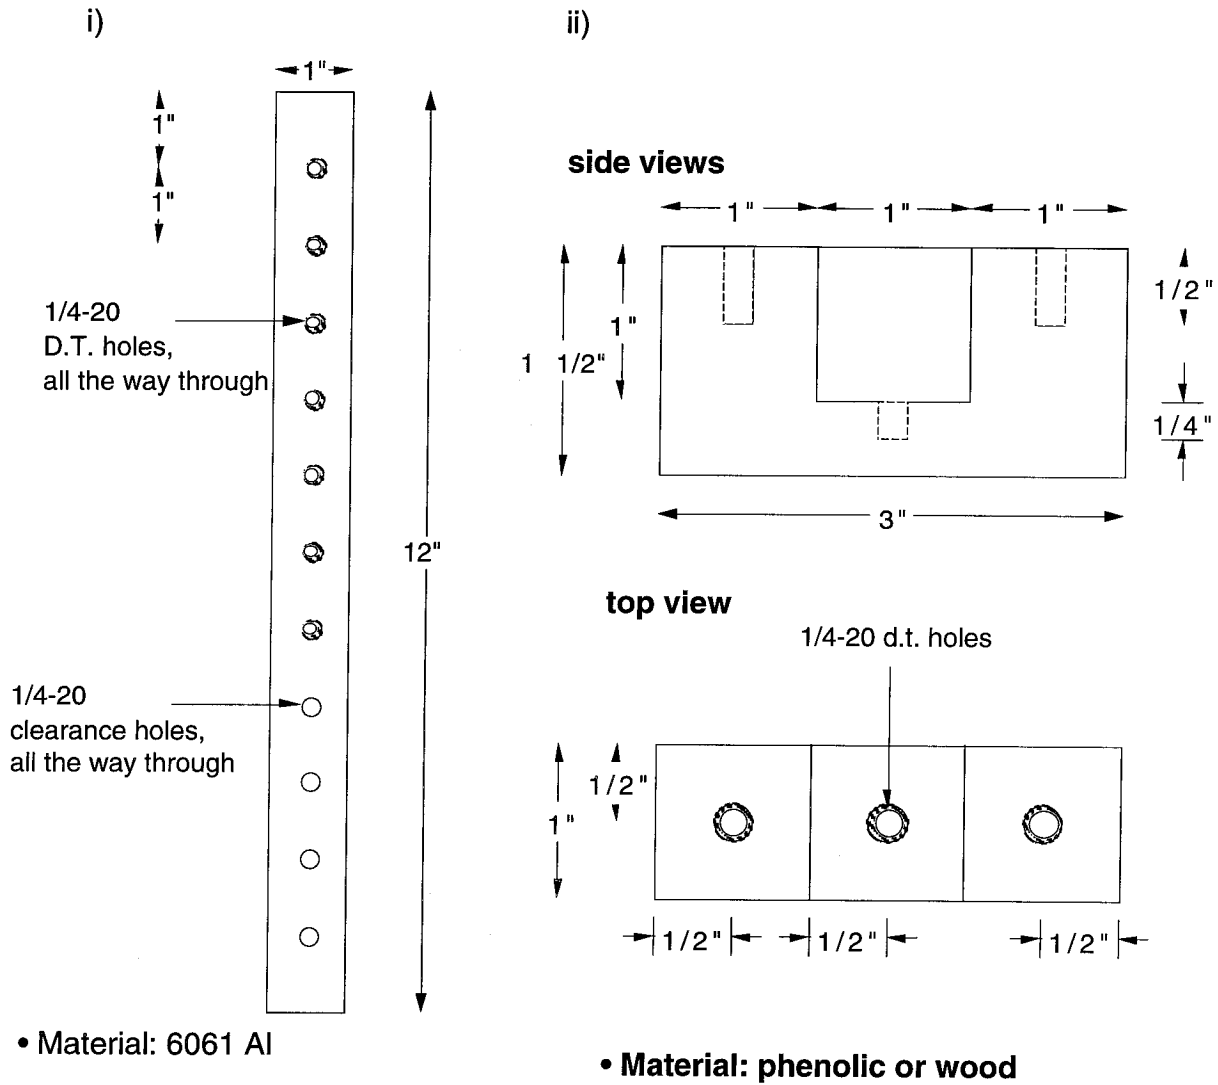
Cross bar (i) used for mounting detectors 2 and 3 in the optical set-up (see Figure 2.7). Parts (ii) are used to attach the cross-bar to the center bar running between the poles of the magnet and supporting the sample cell.
